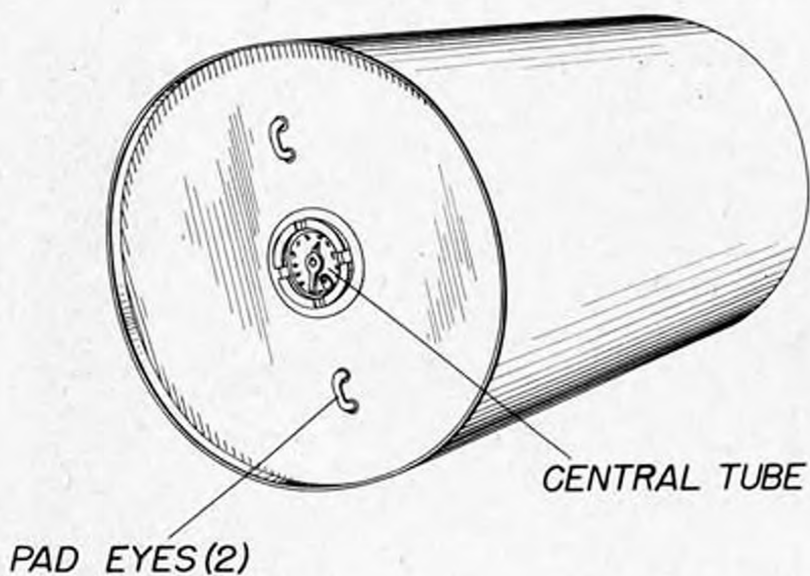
Type 2, Modification 1 Depth Charge, Pistol End
